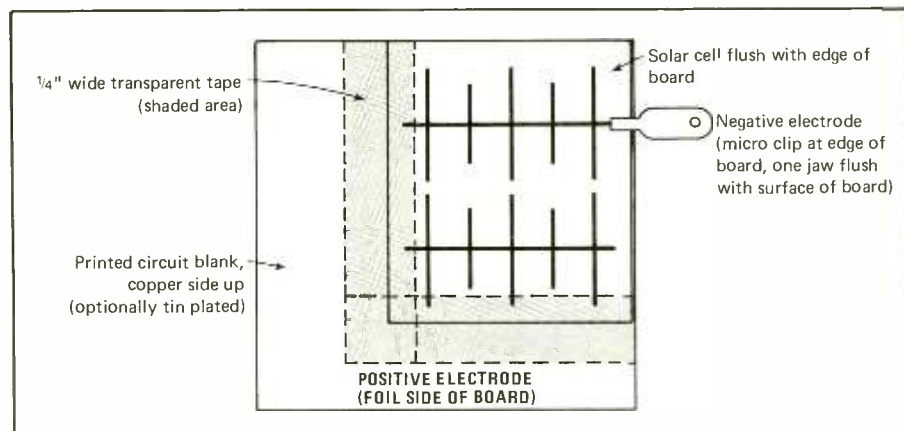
Mounting details for the photovoltaic solar cells on a printed-circuit board blank.
